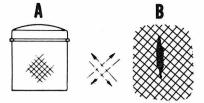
Refer to text for fitting piston to cylinder (A) and for removing material transferred to cylinder bore (B).
